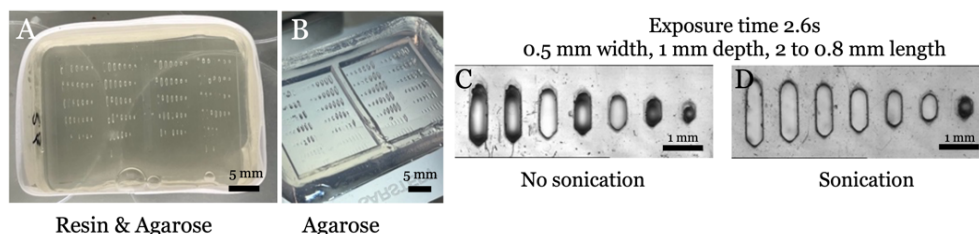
Resin mould to explore SLA print settings filled with agarose (A) and agarose mould after casting (B). Zoom in of the resin mould after print, wash and UV curing (C) and zoom in on the same design region after additional washing step of isopropanol sonication (D) (Exposure time 2.6s - 0.5 mm width, 1 mm depth, 2 to 0.8 mm length).
